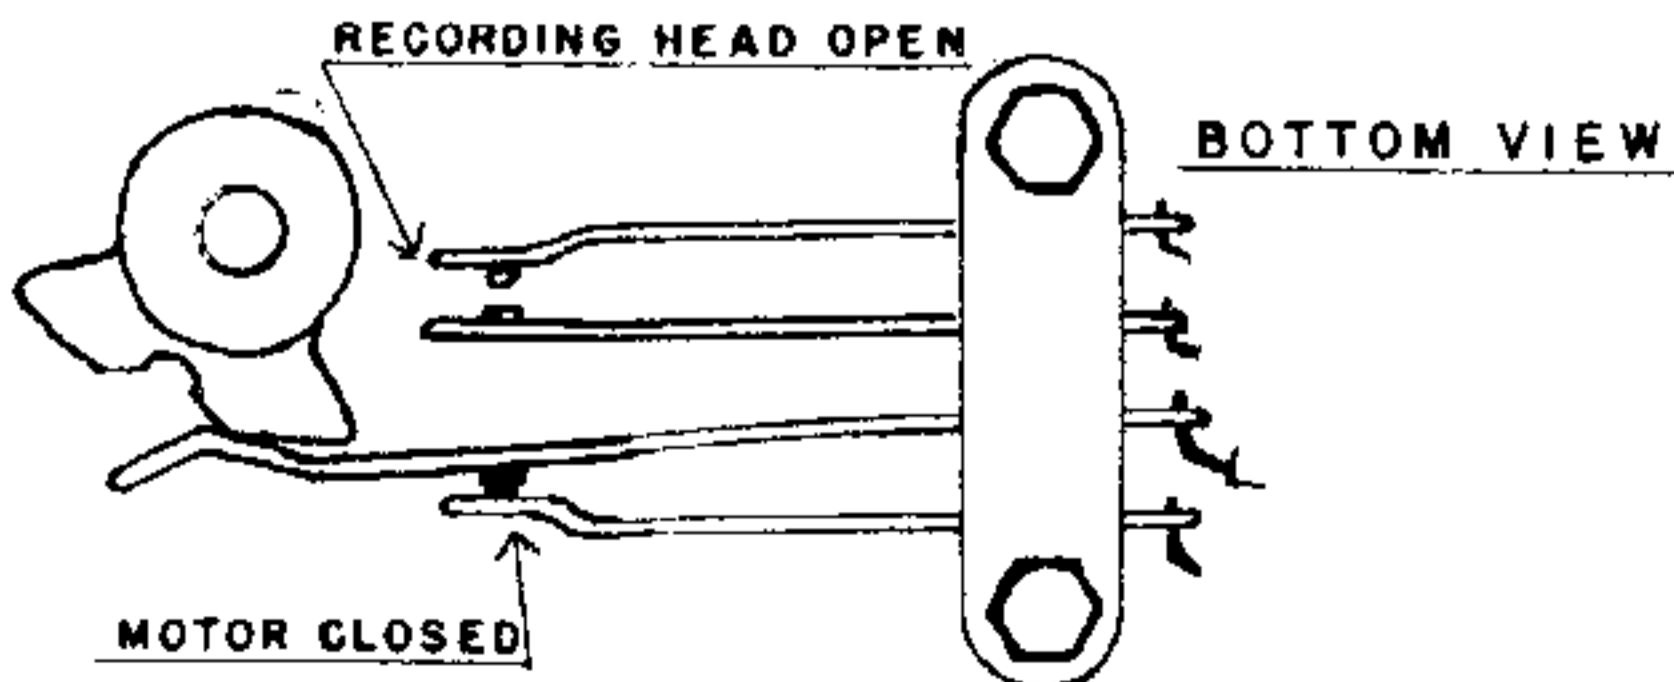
MOTOR CONTROL SWITCH — "REWIND" POSITION
